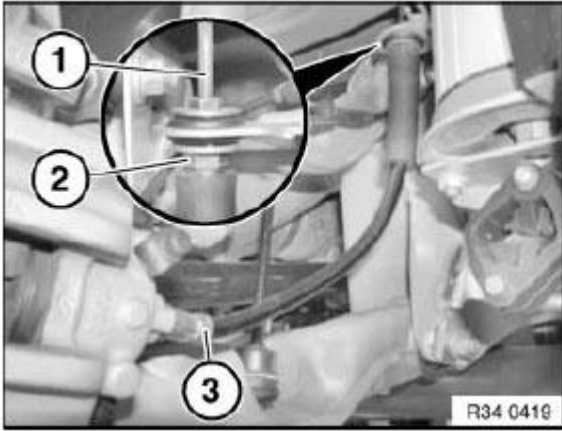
Identifying Brake Caliper, Brake Line And Square Head
